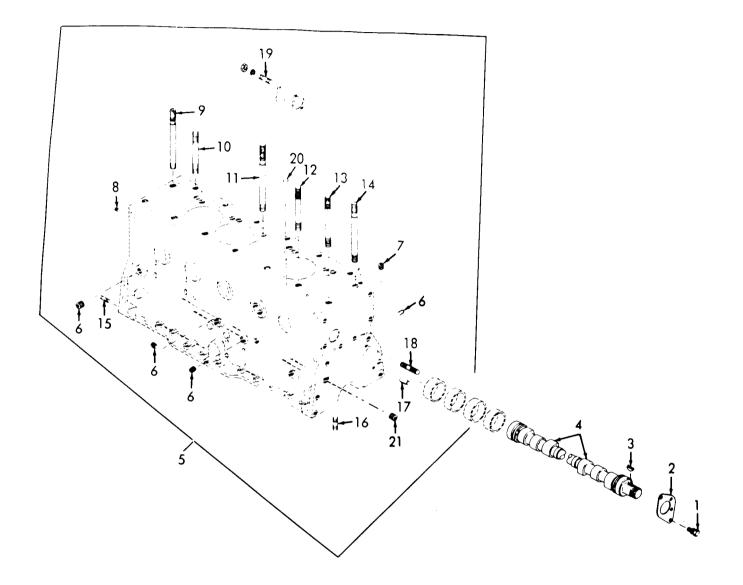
Cylinder Block Assembly (Sheet 1 of 2).
